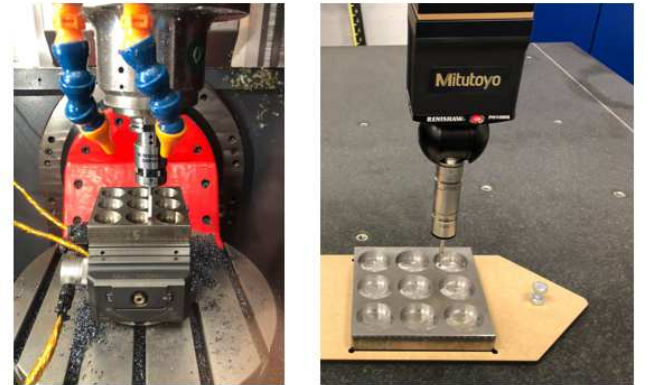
On-Machine Probing (left) and Coordinate Measuring Machine (right) inspection.
